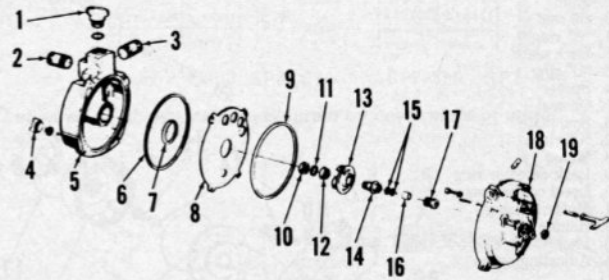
Exploded view of Model 121TP2-1 and 121TP2-1A trash pump. Model 112TP2 is similar but washers are used in place of spacer (16)
